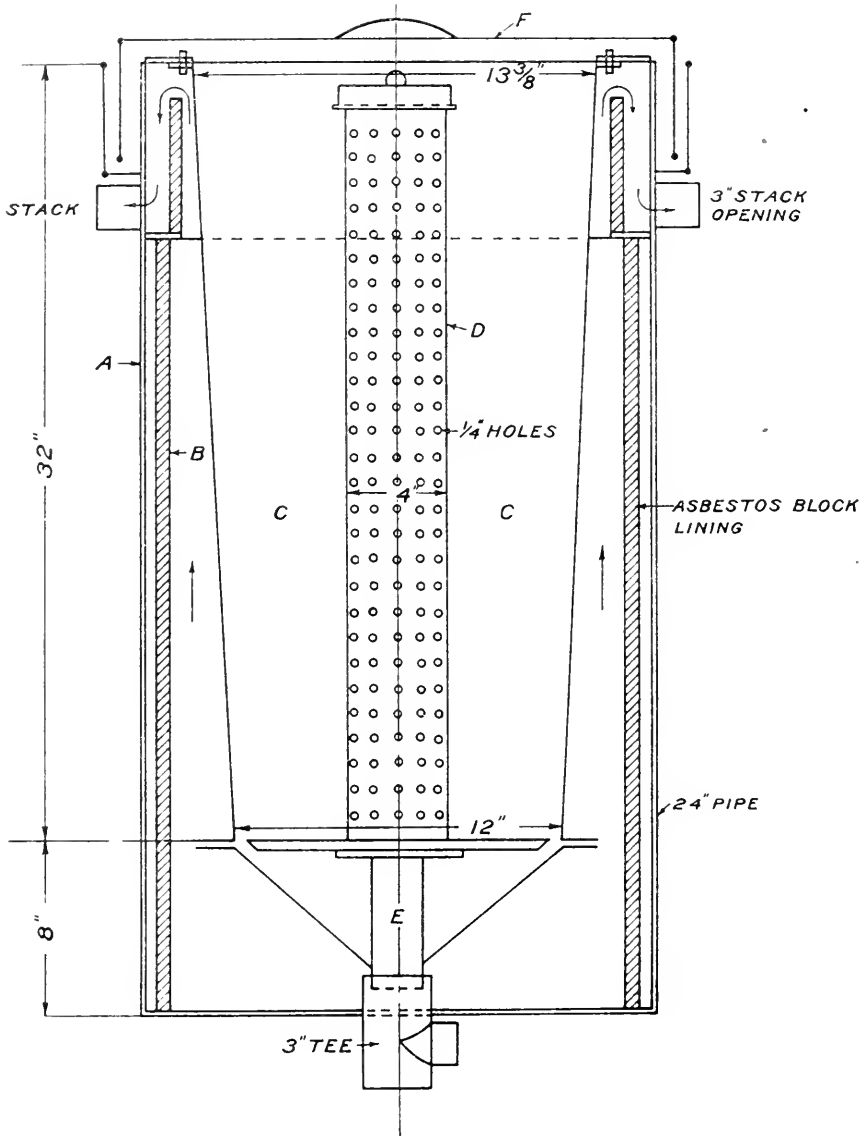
Detail of Wallace retort capacity 90 lb. coal.
